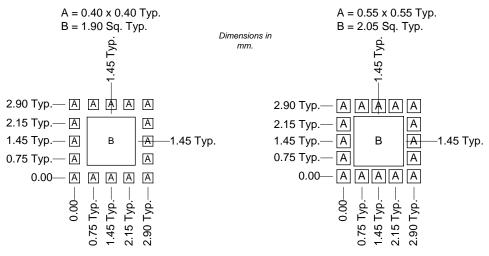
PCB Metal Land and Solder Mask Pattern (Top View)
